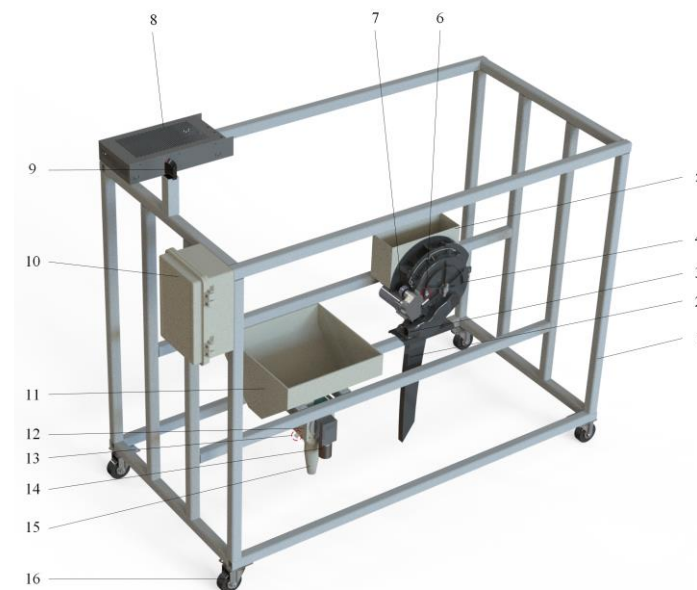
Structure diagram of seed fertilizer co-sowing device. 1. Aluminum profile machine. 2. Seed guide tube. 3. Aspirating pipe. 4. Seed metering device. 5. Seed box. 6. Seed sensor. 7. Seeding motor and its encoder and reducer. 8. Power supply. 9. Beidou/GPS antenna. 10. Distribution box. 11. Fluted roller fertilizer apparatus. 12. Fertilizer apparatus. 13. Fertilizer sensor. 14. Fertilizer motor and its encoder and reducer. 15. Fertilizer guide tube. 16. Wheels.
